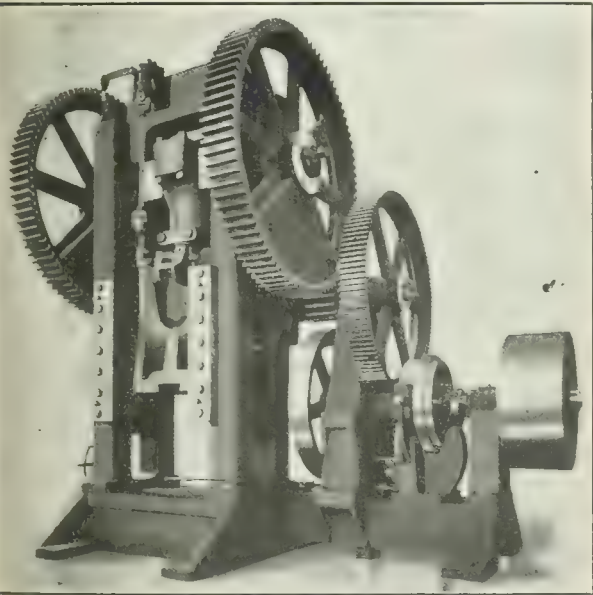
A Single Crank Press Weighing 275,000 Lb. Built by the Toledo Machine & Tool Company, Toledo, Ohio.
